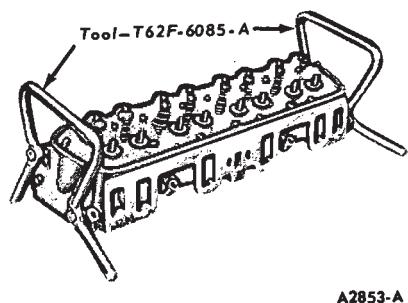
Cylinder Head Holding Fixtures—302-2V and 351-W Engines
